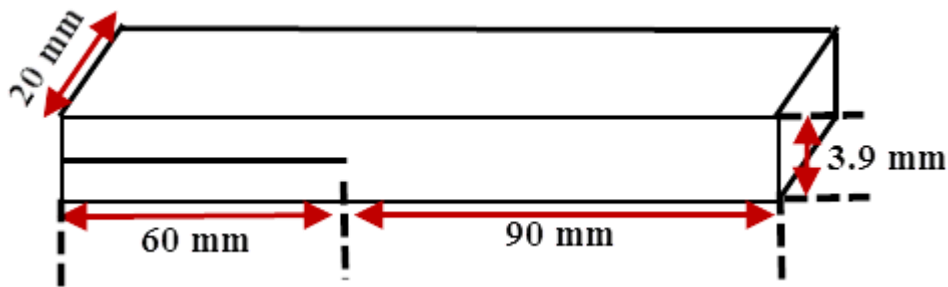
Mode-I Mode-II mixture fracture test specimen dimensions.
